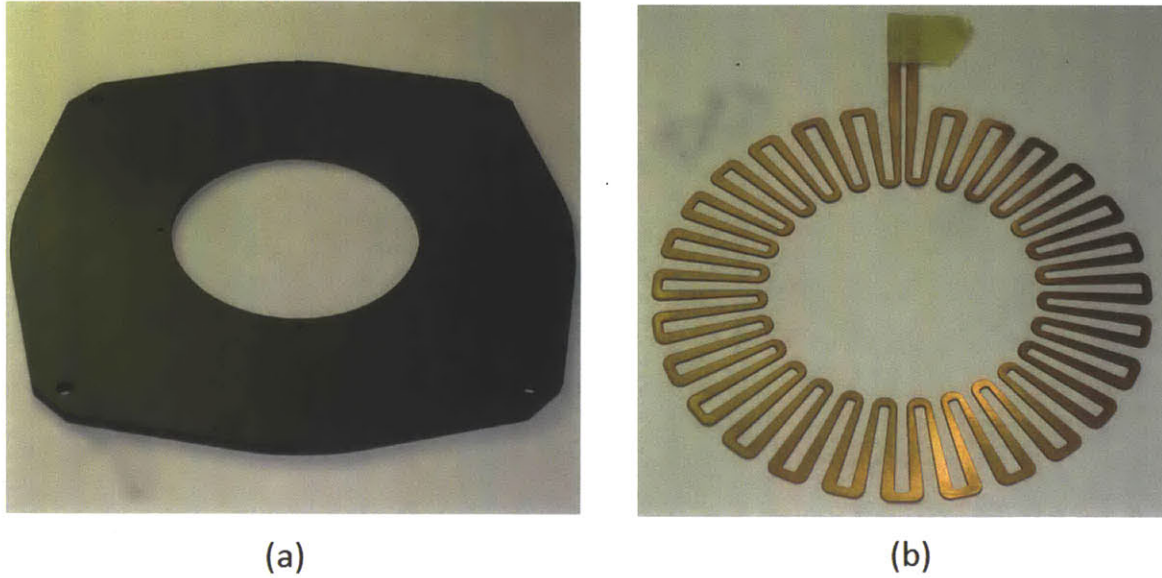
(a)Back iron plate (b)copper wingding with terminal masking.
